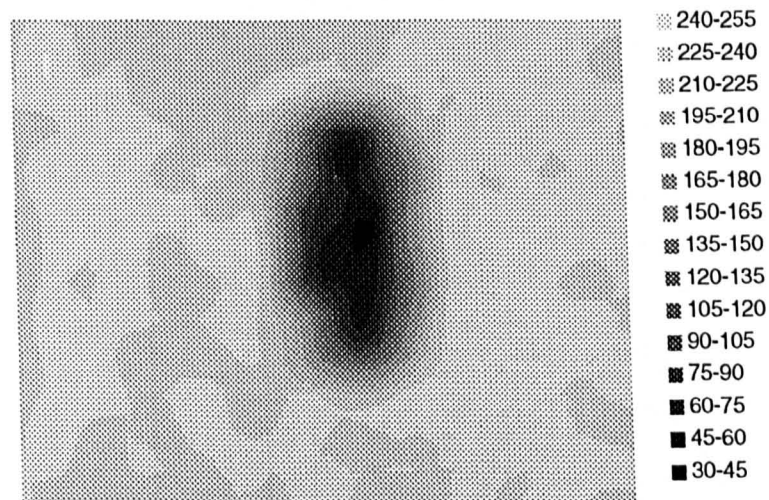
(b) Grey-scale image of defect in aluminium test-piece
